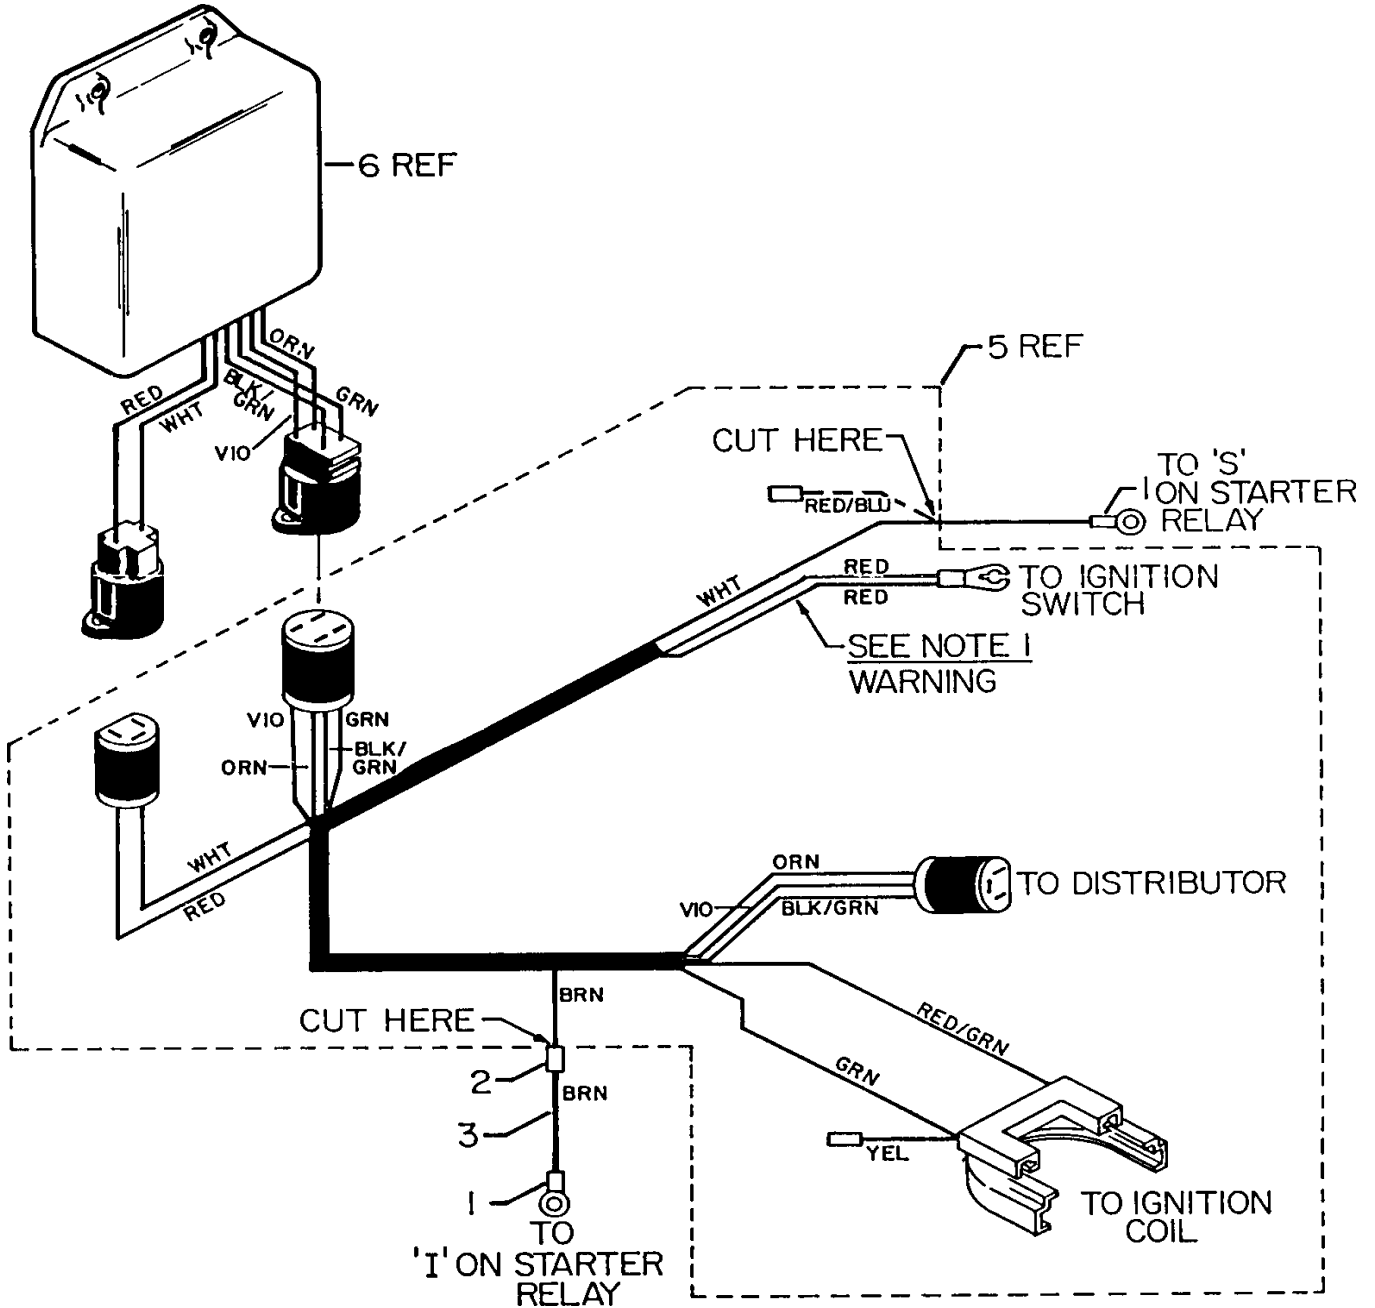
IGNITION MODULE WIRING HARNESS (51705708)
